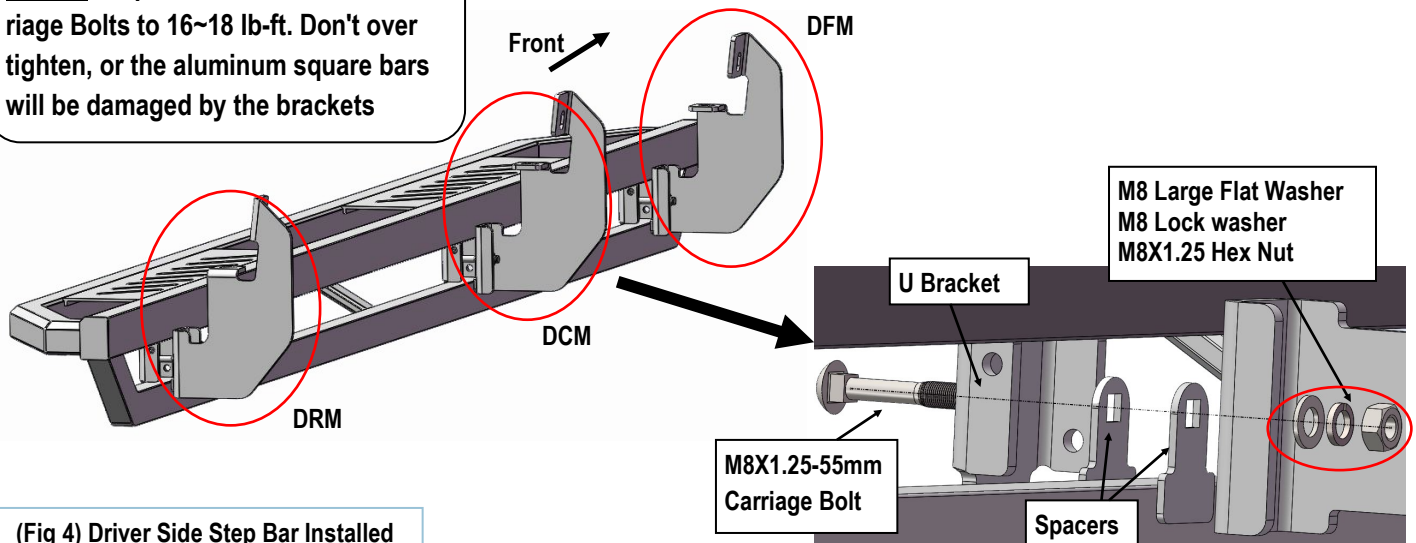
Driver Front Mounting Bracket (DFM /DCM/PRM) Installation Pictured
